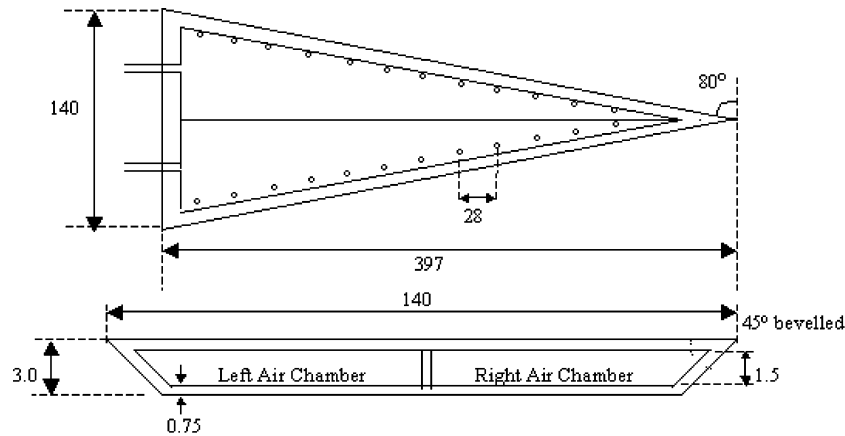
Schematic plan and back view of the slender delta wing model; all dimensions in millimeters, not to scale.
